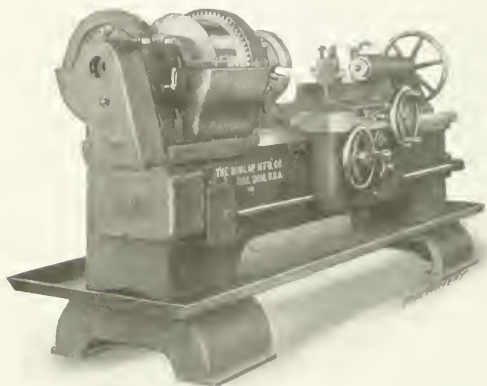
Partial End View of Dunlap Lathe shown in Fig. 1
